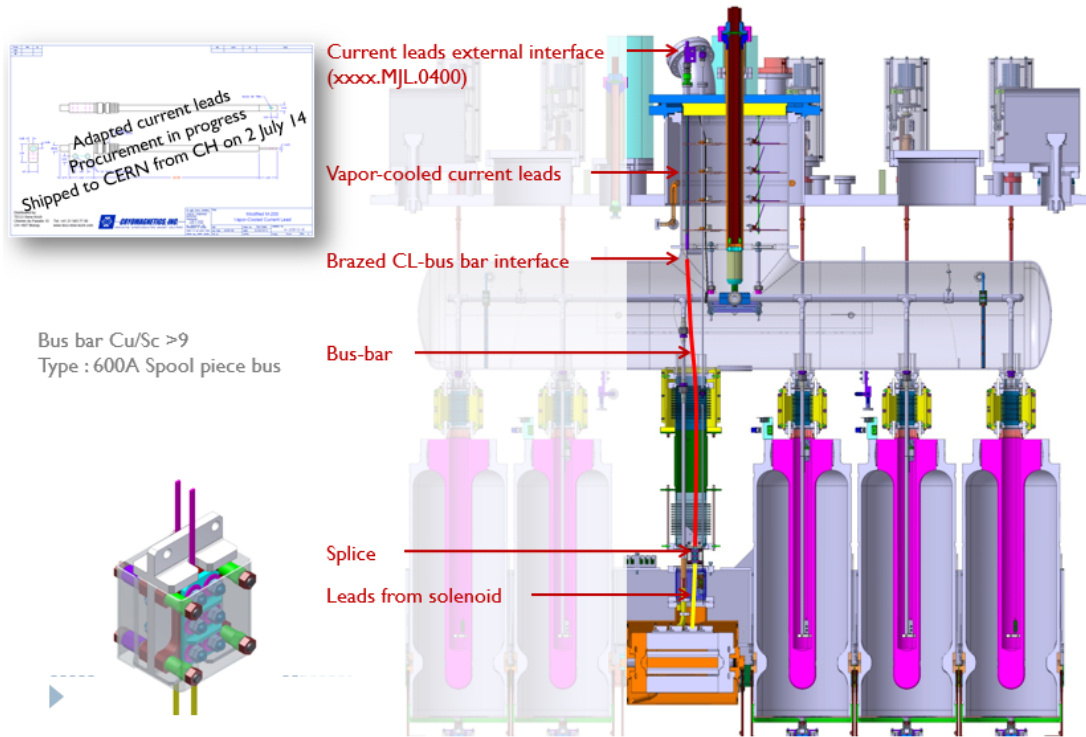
Layout of the solenoid supply, details in [18]. The bus-bar is in two parts, an upper part in OFE copper tapering to a cross section where it is US welded to an 1 m length of 600 A capacity rectangular section superconducting wire.
